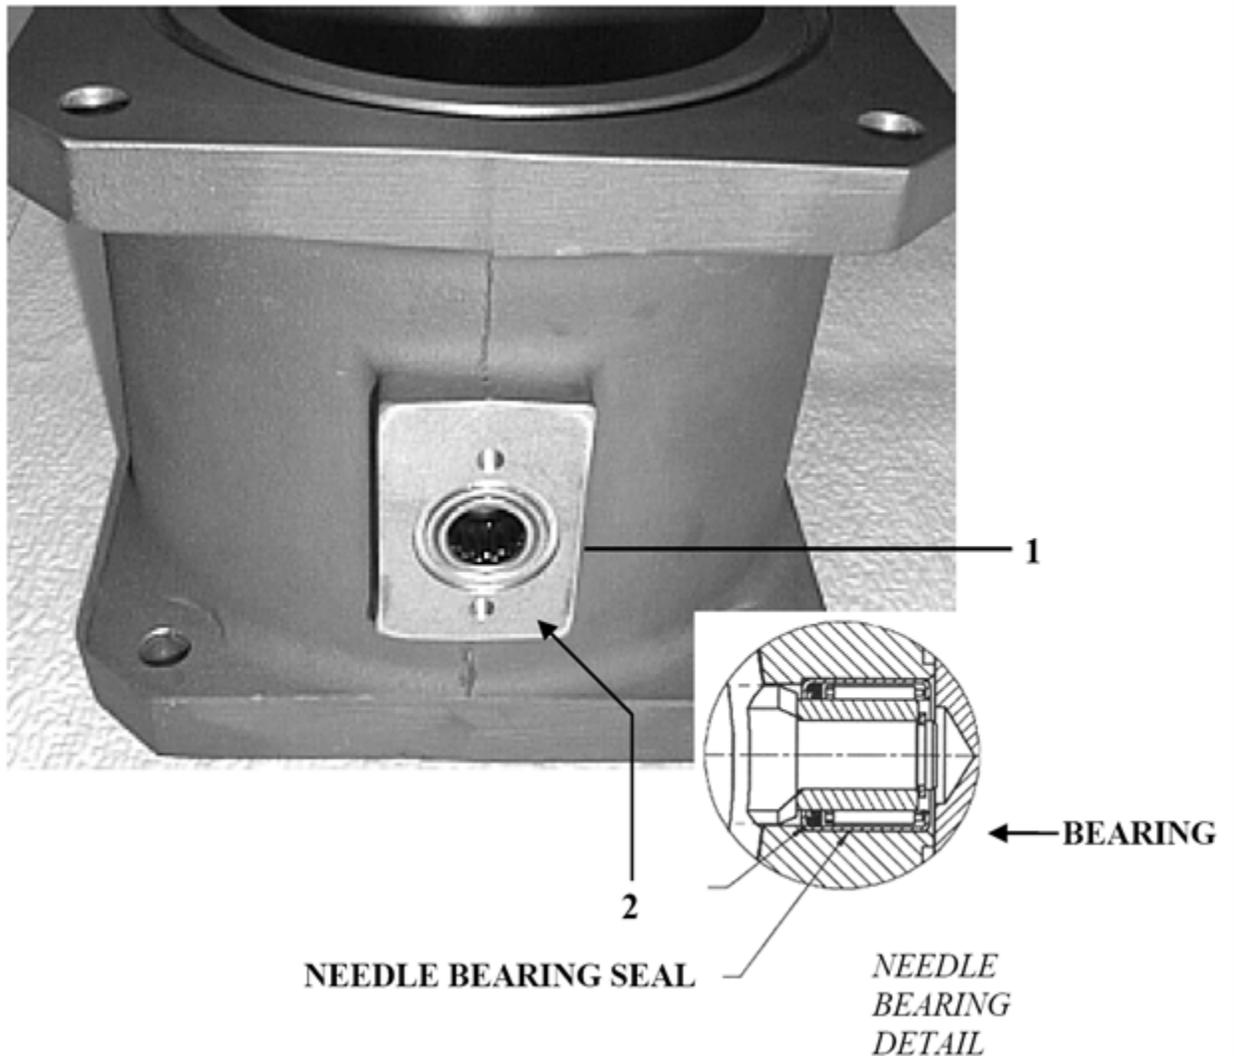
Installation of Shaft / Throttle Housing Bearing
